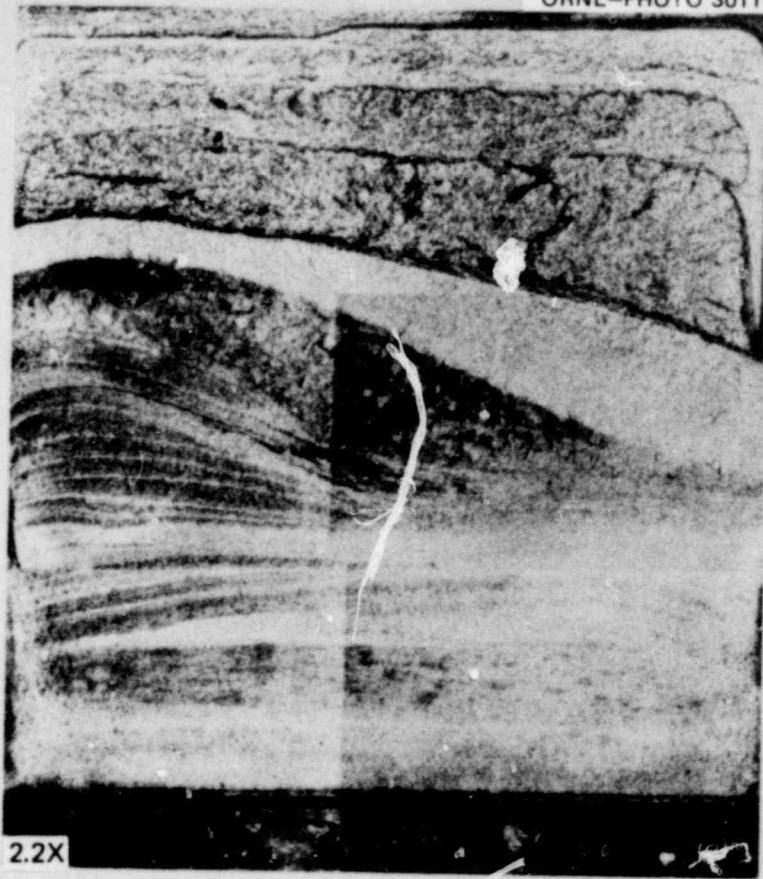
Fracture surface of specimen R-11.
